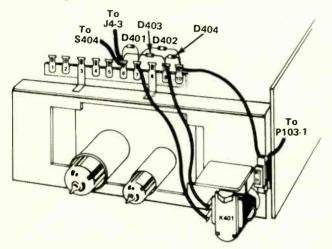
Tuner assembly removed from cabinet to show component location of early production circuit.
